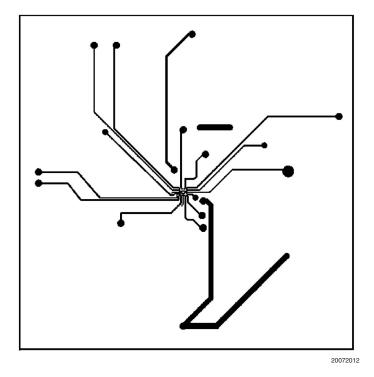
LM4930ITL Demo Board Inner Layer 1
